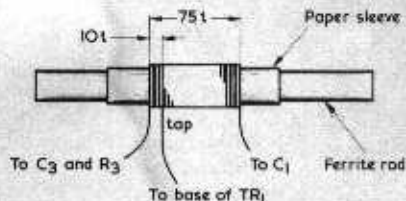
Winding details of the ferrite rod aerial coil. It is advised that a few extra turns are put on initially, as described in the text, so that the coil inductance may be adjusted for the desired tuning range after the receiver is completed
